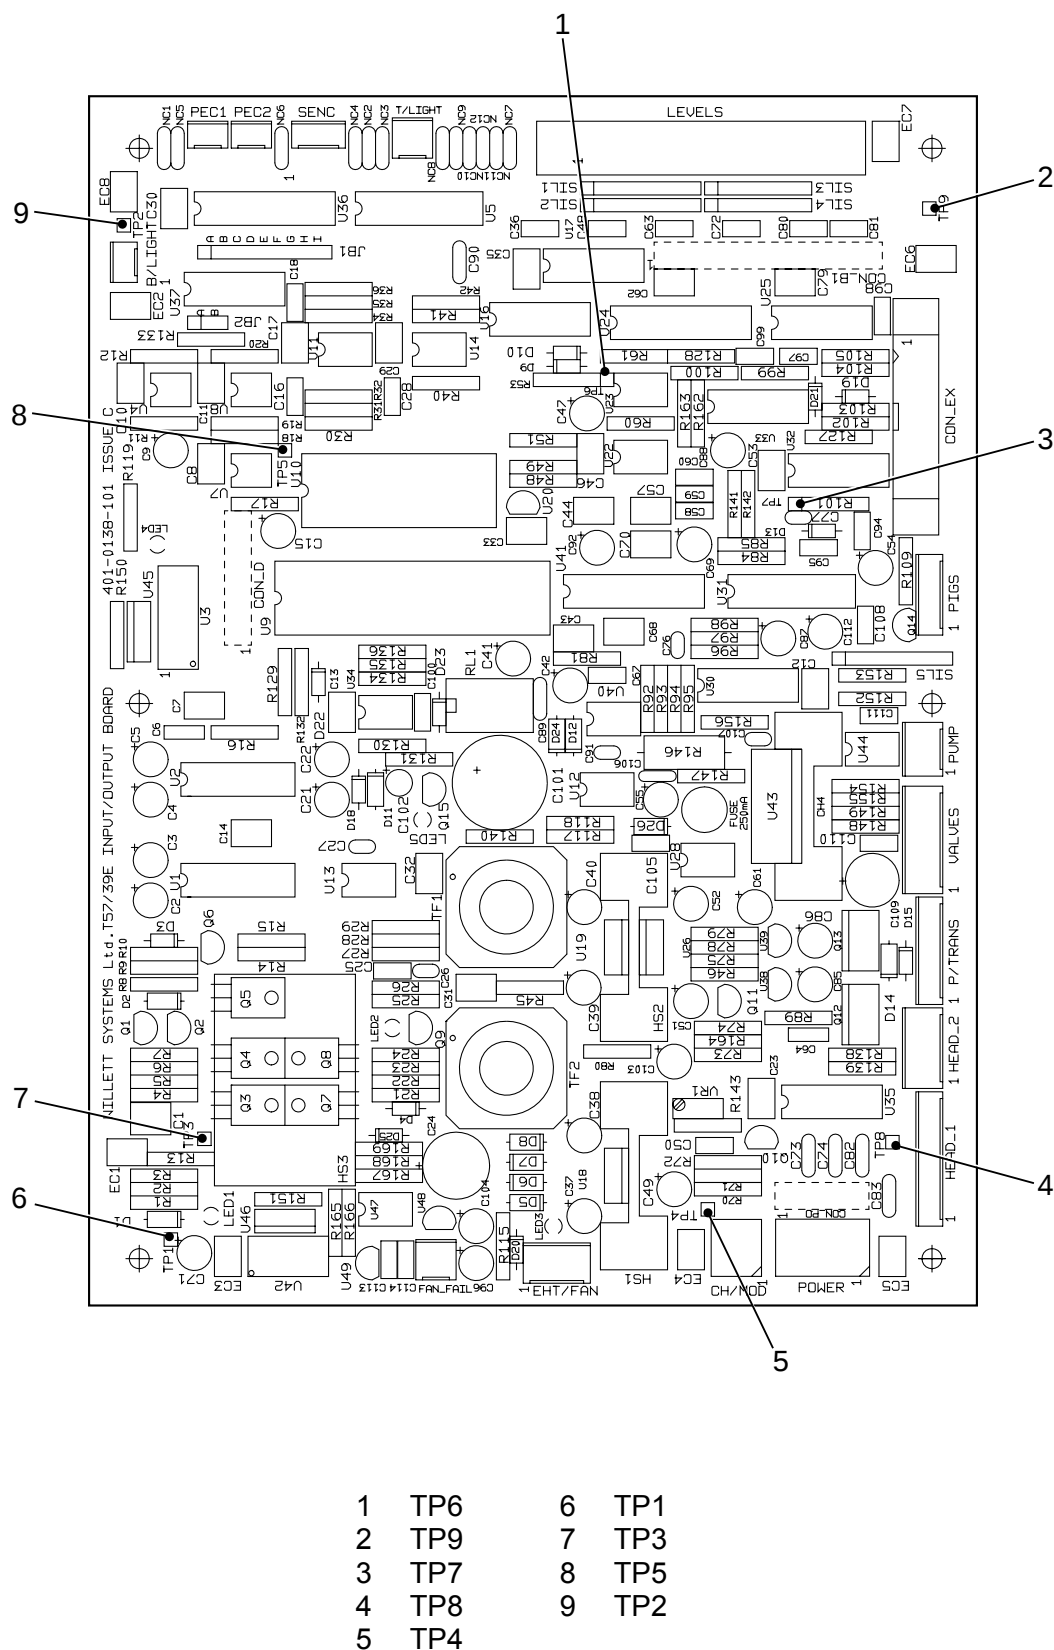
I/O board TP location; Mk 1 (sheet 4 of 4)
